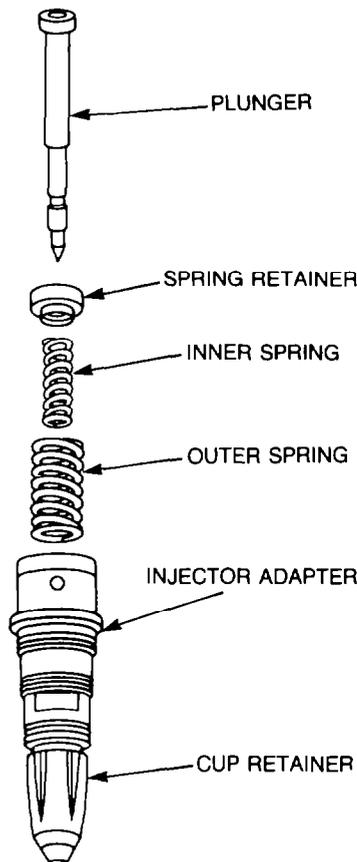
Assembly of Injector for Top Stop Travel Adjustment
